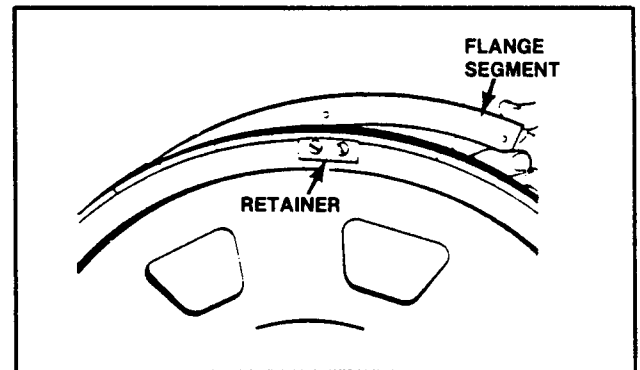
REPLACEABLE FLANGE WHEEL SEGMENTS.
